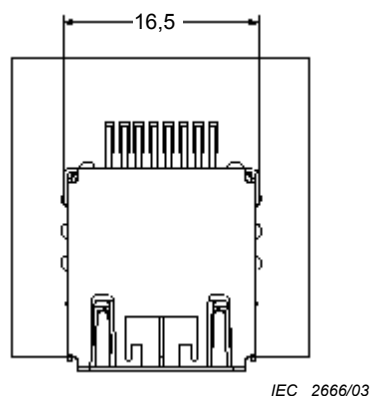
Front view fixed board connector (XB) right angle (version 2)
